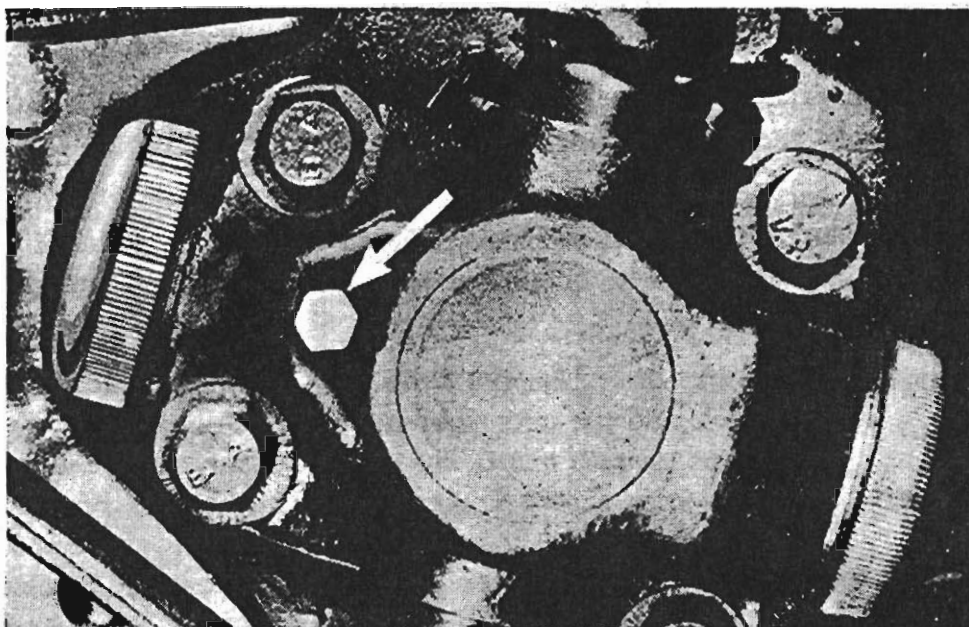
Remove the Filler Plug Indicated and Fill to the Bottom of the Filler Plug Hole.
